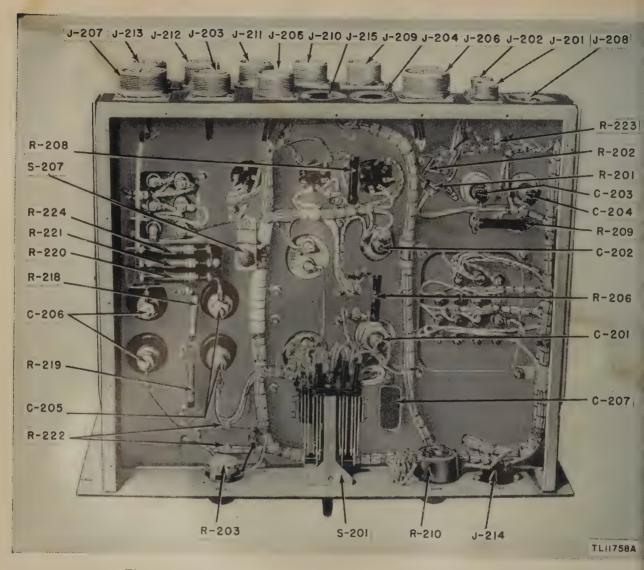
Control Panel PN-31-A, placement of parts, bottom view.
